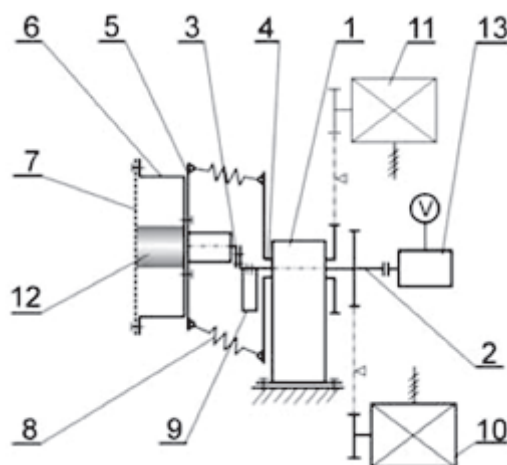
Schematic diagram of the vibratory mill: 1 – drive module, 2 – shaft vibrator, 3 – an eccentric shaft, 4 – shaft drive enclosure, 5 – shield, 6 - chamber, 7 – bonnet, 8 – an elastic element, 9 – weight, 10 – a vibrating motor, 11 – the engine compartment, 12 – the insert, 13 – the vibration frequency measurement sensor [Sidor & Tomach, 2013]
